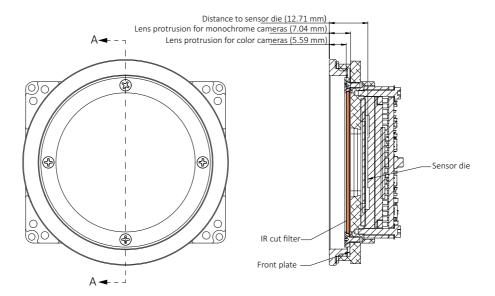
Cross section of Prosilica GT Large Format camera front assembly with M58-Mount
